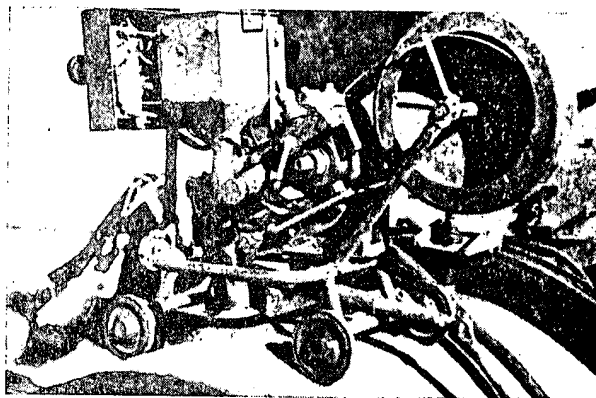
Automatic submerged-arc welding machine «PT-56»
